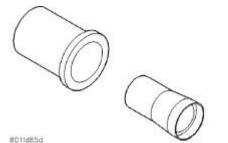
INSTALLER/PROTECTOR - C-4992 Courtesy of CHRYSLER LLC
